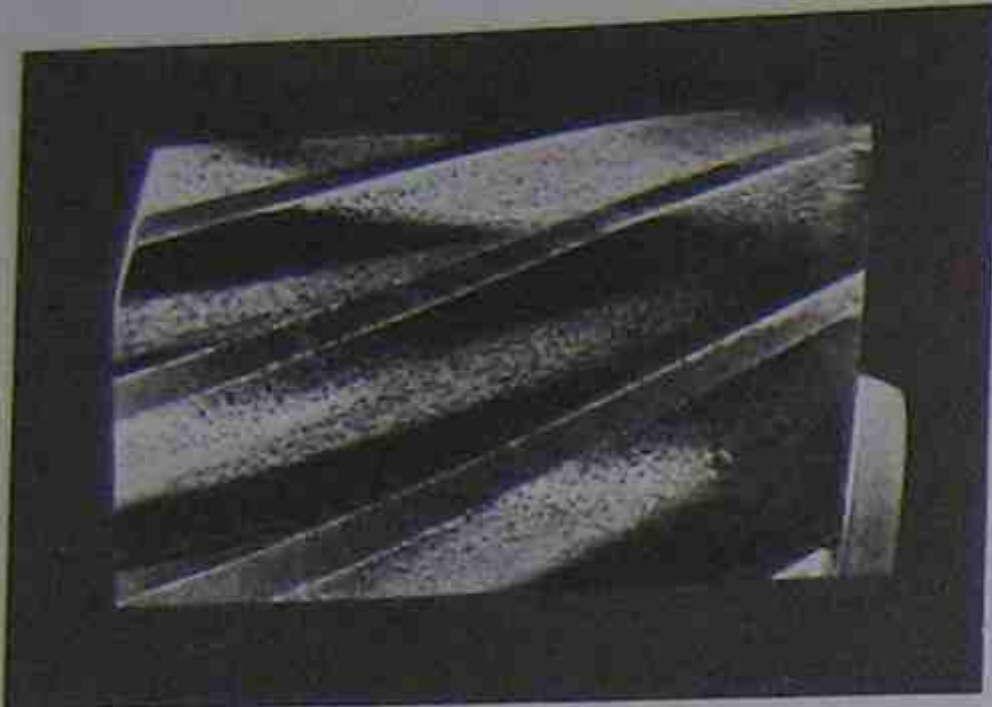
Etching of gear tooth surfaces due to corrosive wear.
